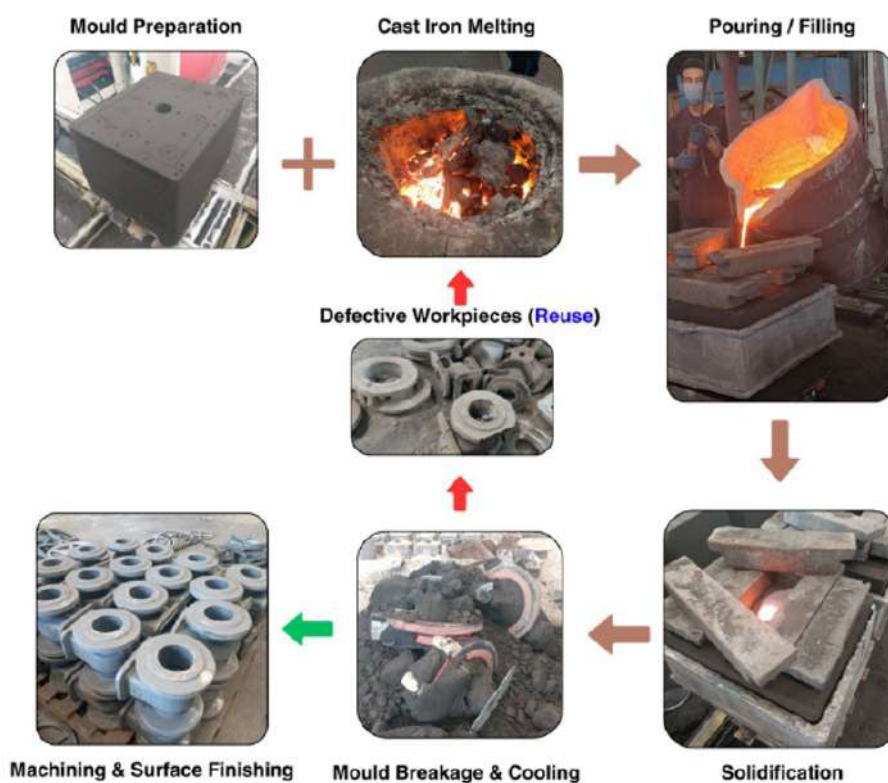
The current sand-casting process used in the company and its detailed steps: (a) Mould production by automatic machine, (b) Cast iron melting in the induction furnace, (c) Pouring molten cast iron into the mould, (d) Solidification process, (e) Mould breakage, cooling, machining, and surface finishing.
